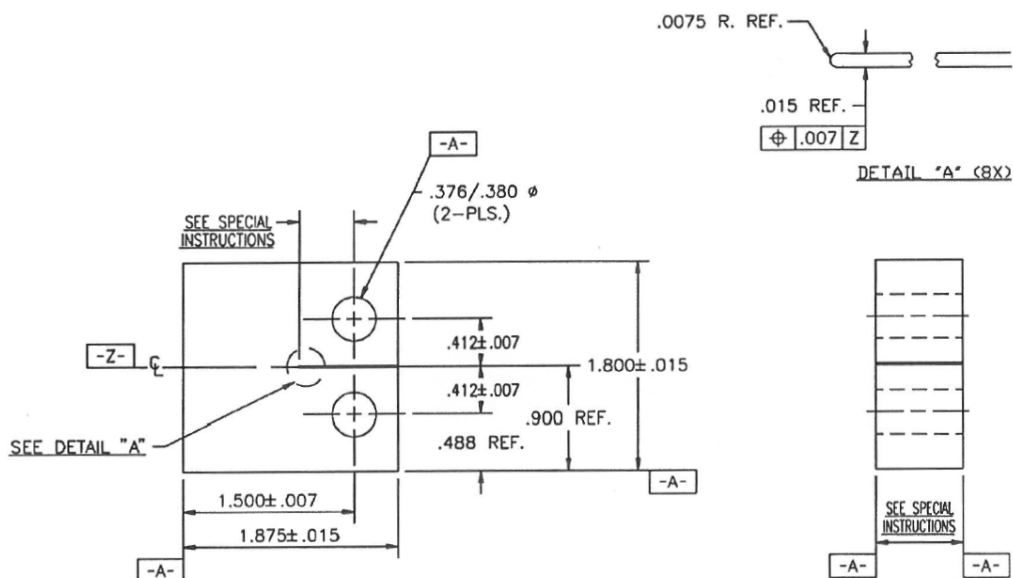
C(T)-specimen, dimensions in inches. The specimen width at GKN is 6.35mm.
